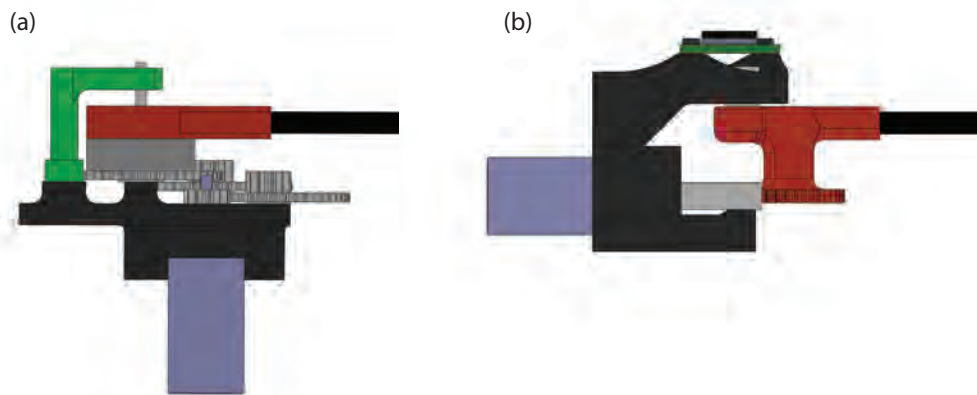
(a) TD I uses spur gears, necessitating a large vertical footprint. (b) TD II employs a worm gear, making for a more compact design.
